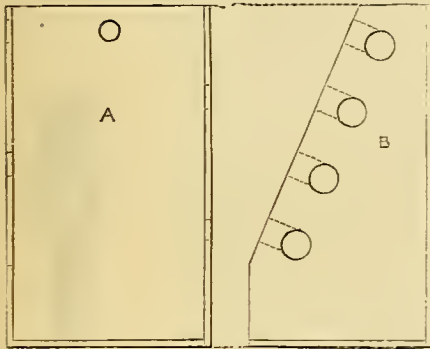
PIPE RACK. A, Front Elevation. B, Side do.
